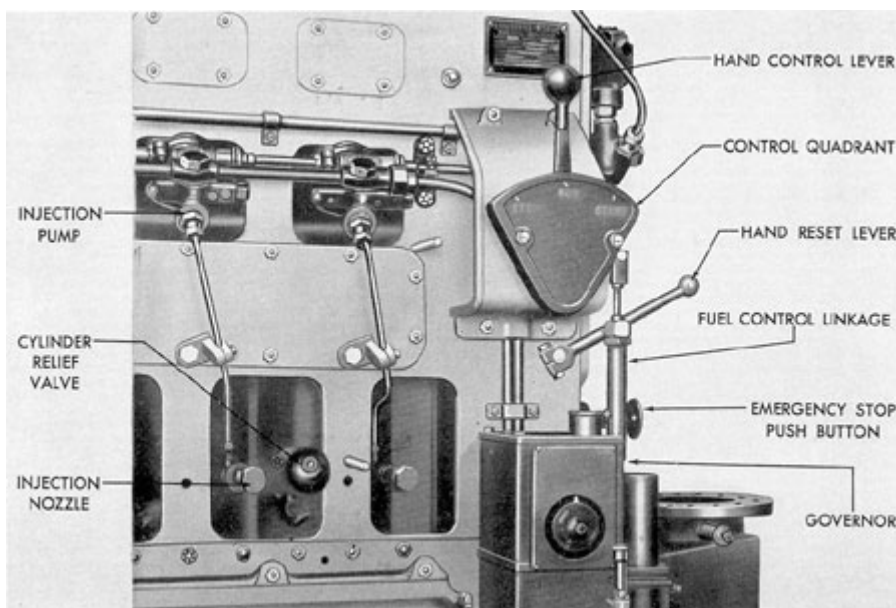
Engine controls, end view, F-M auxiliary engine. supply of fuel as described in the preceding paragraph. should be inspected to see that it is operating at the correct speed.
